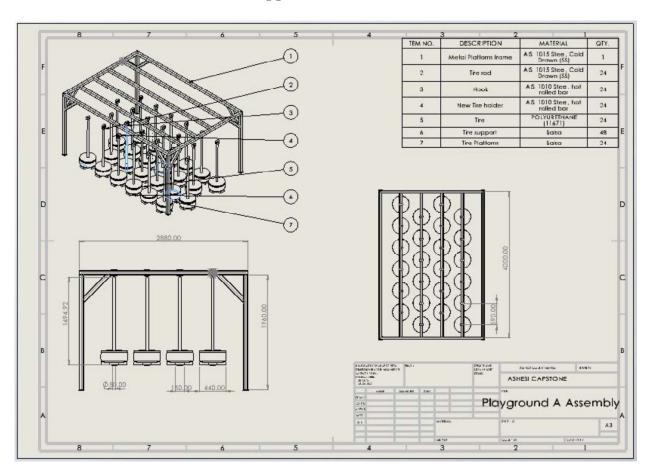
Structure 1 Assembly Drawing and dimensions.
